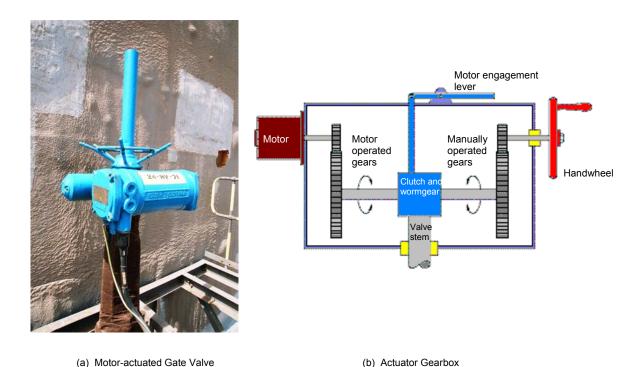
Motor Operated Valve and Actuating Gearbox
